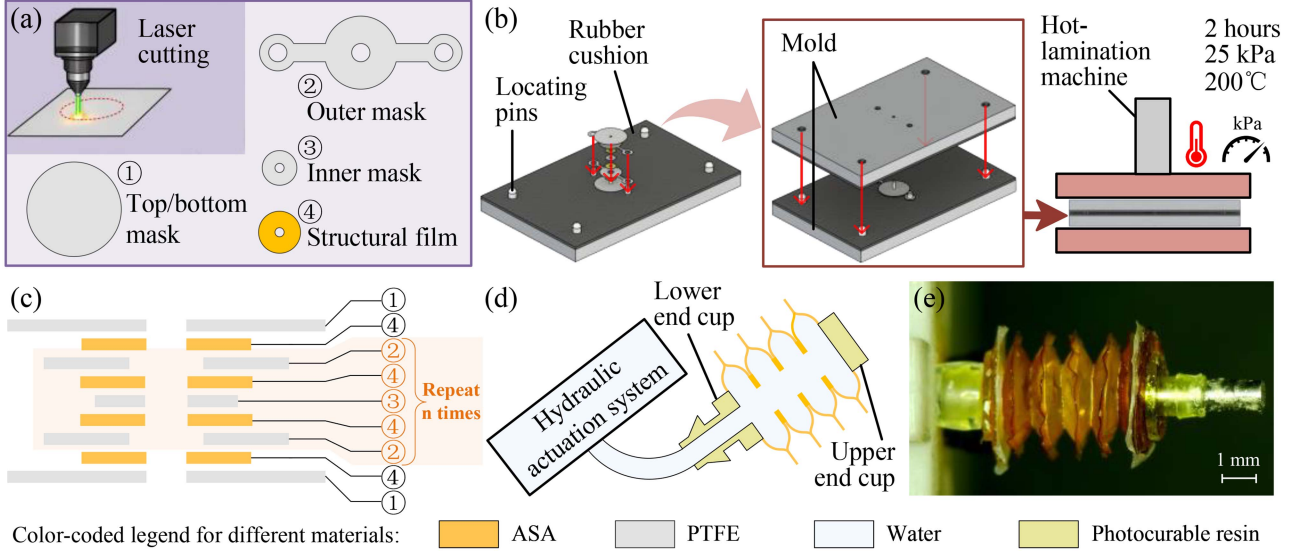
Fabrication process of the soft bellows actuator (SBA). (a) Films are precisely patterned by laser cutting. (b) The patterned films are stacked in a mold and accurately aligned using locating pins. The mold is then closed and placed into a hot-lamination machine at a temperature of 200°C and a pressure of 25 kPa for 2 h. (c) The detailed stacking order of the films selectively bonded to form the SBA. (d) After demolding, the upper and lower end caps fabricated by 3D printing are bonded to the laminated films, enabling hydraulic actuation of the SBA. (e) An example of the fabricated SBA prototype with three corrugations. Abbreviations: ASA, acrylic sheet adhesive; PTFE, polytetrafluoroethylene.
